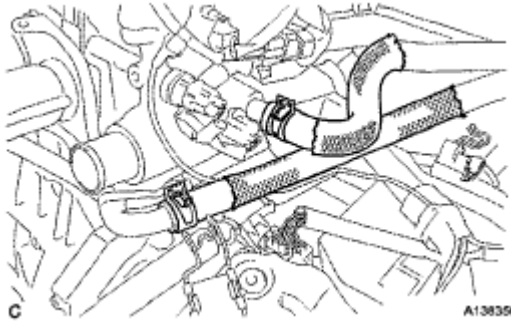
Identifying Heater Outlet/Inlet Water Hose
